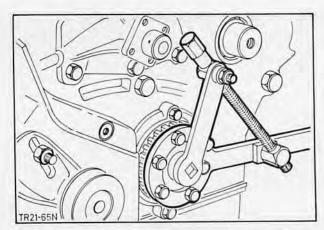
Secure crankshaft journal bolt using Special Tool 21–018/019
